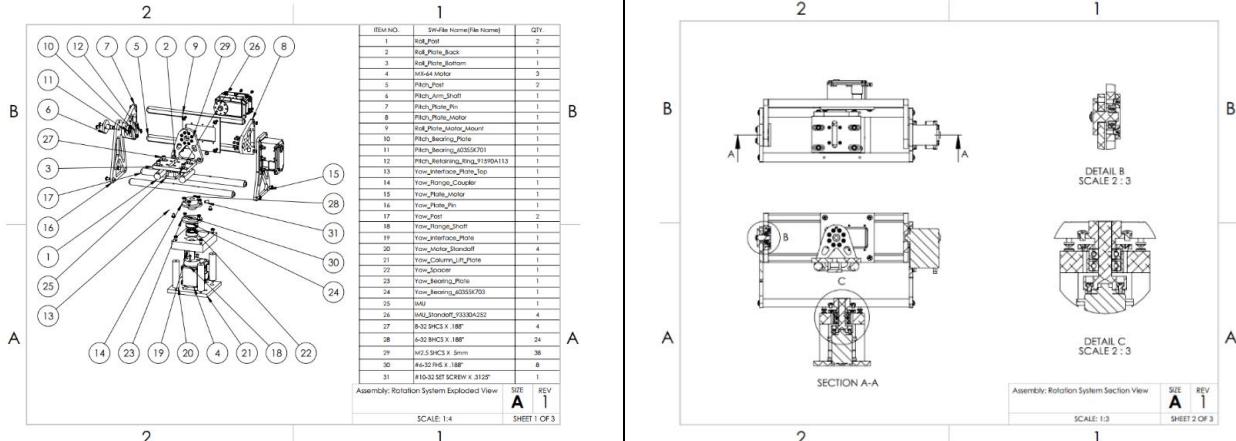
Images showing the exploded view drawing and projected view of camera gimbal system I machined
